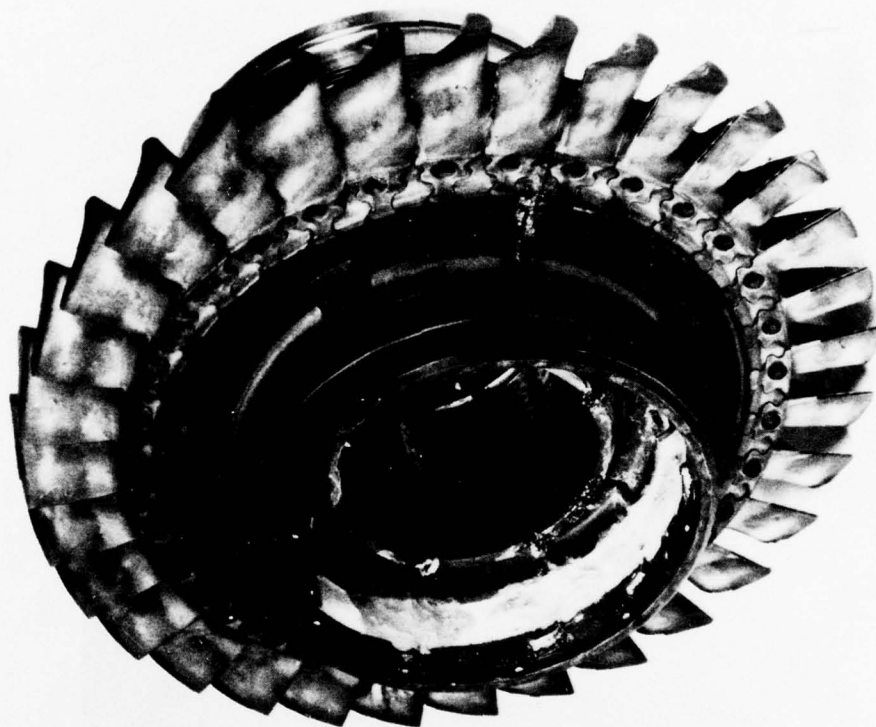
Instrumented Gas Producer Turbine Rotor - Rear View.
